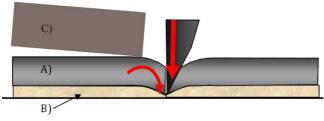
Mechanism of edge bending a) bundle of aluminum sheet b) cardboard c) pressure beam [2]
